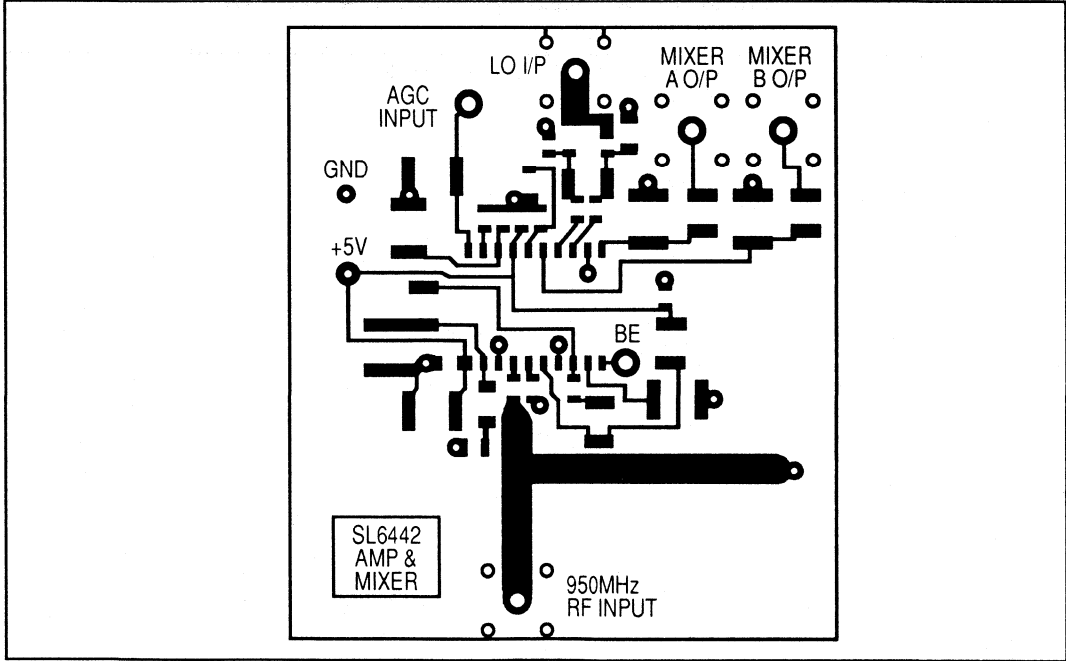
SL6442 demonstration board track. Scale=2 x full size
